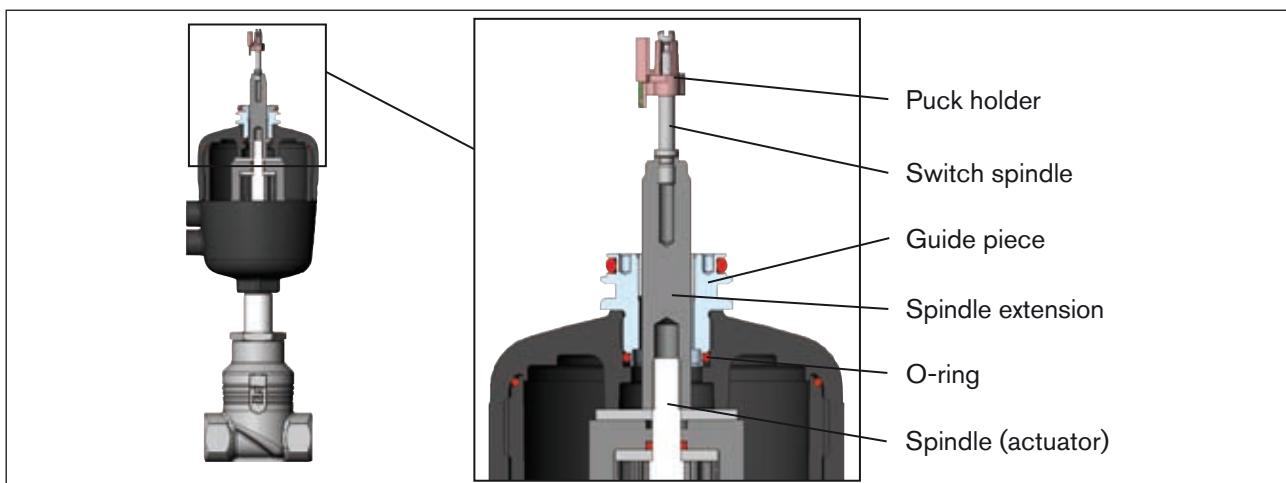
Installing the switch spindle 26xx and 27xx
